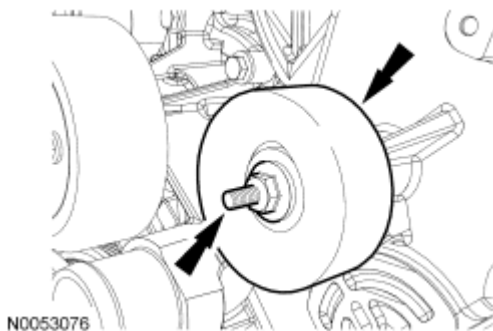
Locating Stud Bolt & Accessory Drive Belt Idler Pulley
